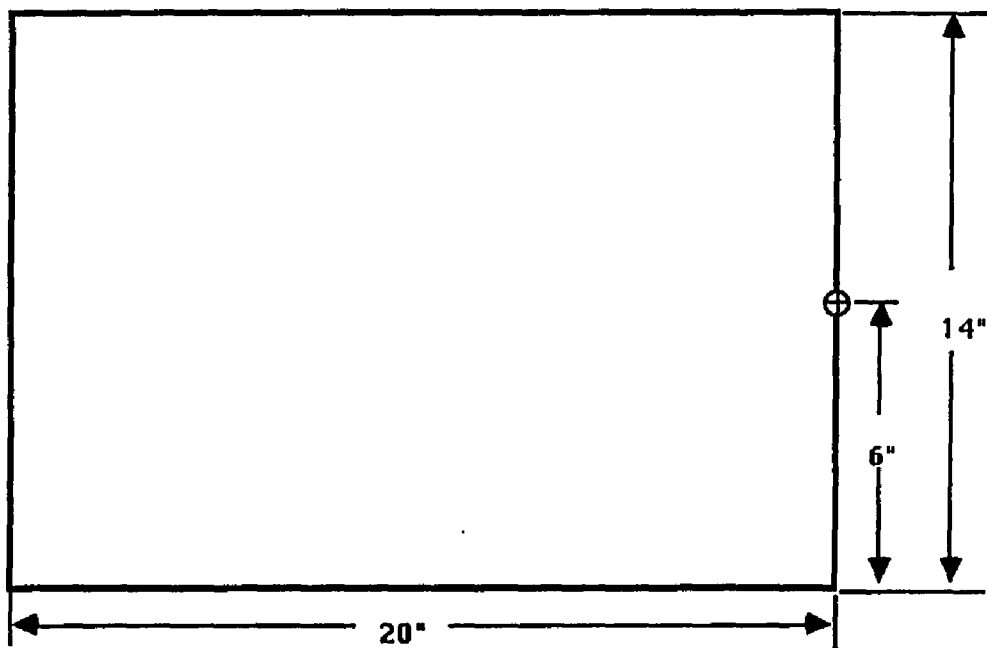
Crimping Machine Footprint in the Wire-Harness Assembly Problem
